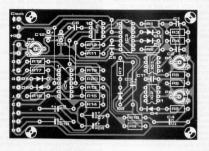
Layout and trackside of the printedcircuit board for the oscillator and control stages.
